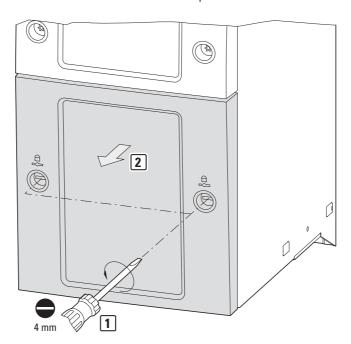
Opening the enclosure on a DA1 variable frequency drive of size FS4 or larger
